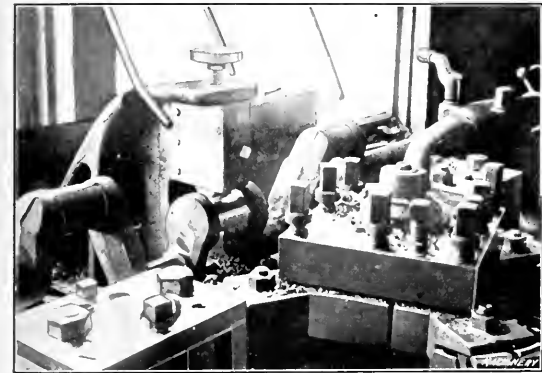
Facing up Crankshafts to provide the Necessary Wheel Clearance
